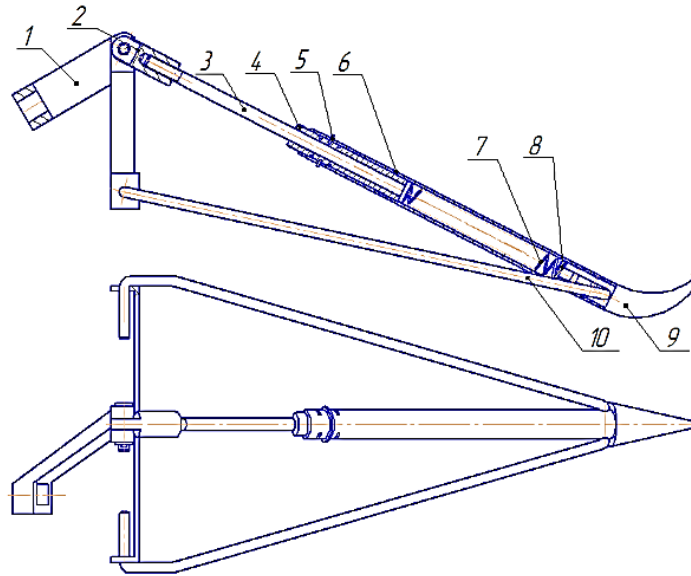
Spring-loaded divider: 1 – bracket; 2 – head; 3 – rod; 4 – sleeve; 5 – ring; 6 – tube; 7 – spring; 8 – washer; 9 – toe; 10 – side rod
